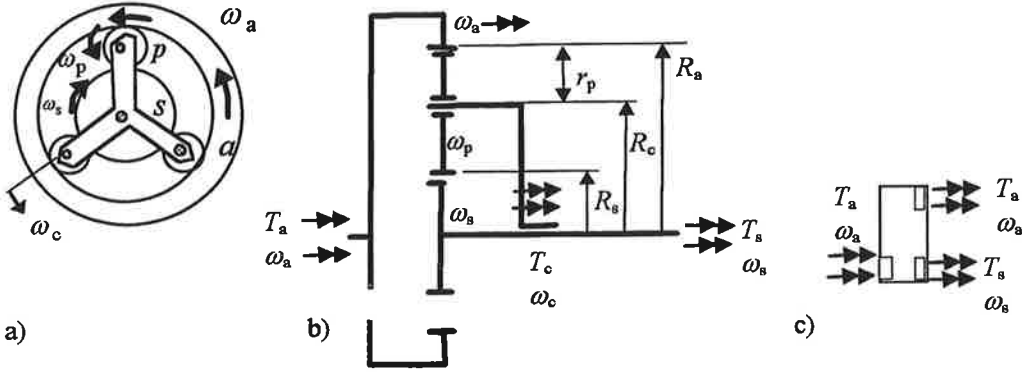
Details of a planetary gear train. a) Cross sectional view showing the main components,  $s$  is the sun wheel,  $p$  is the planet wheel,  $a$  is the annulus wheel and  $c$  is the carrier conveying the planets. b) Side view showing the interconnections. c) Freebody model showing the applied torques and assumed rotations.
